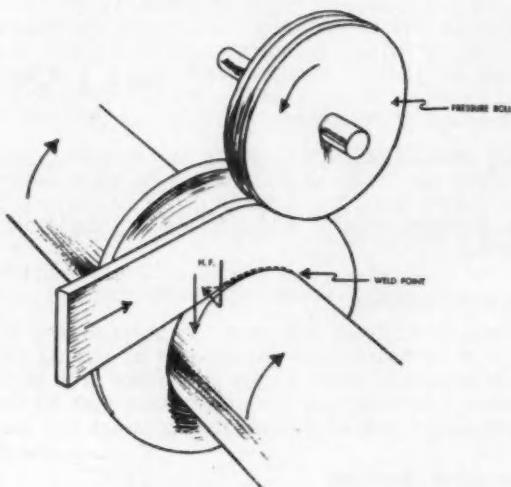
Spiral fins can be welded to tube with the high frequency welding process.
